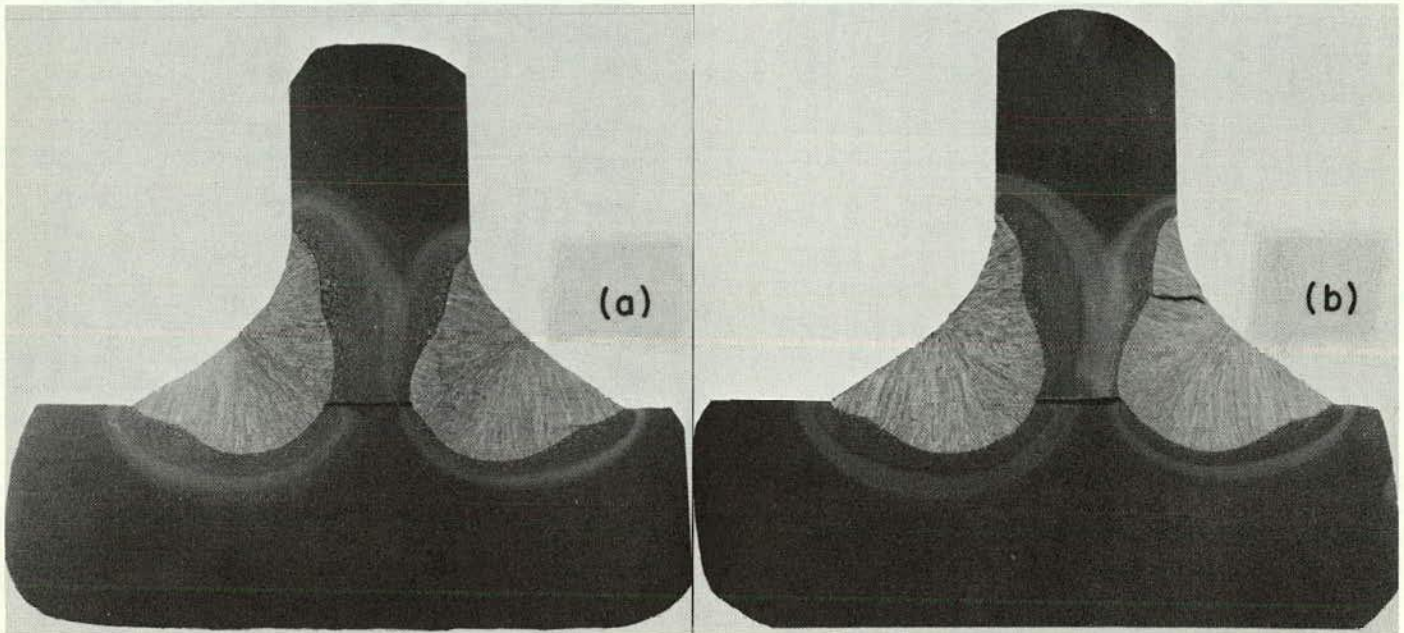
Fillet-weld sections: (a) typical weld section, X3; (b) weld section with crack, X3.
